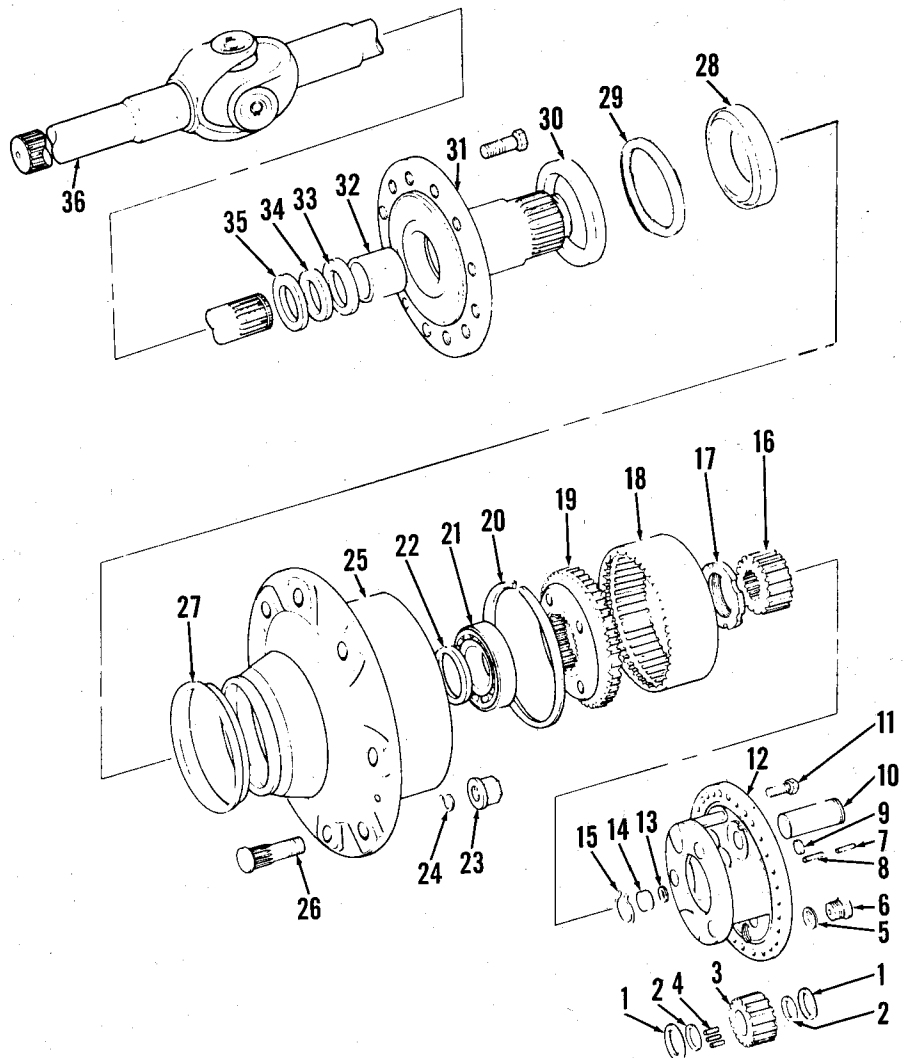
Exploded view of hub, carrier and planetary drive used in models equipped with front wheel drive. Washer (29) is used in TW-30 models only.
